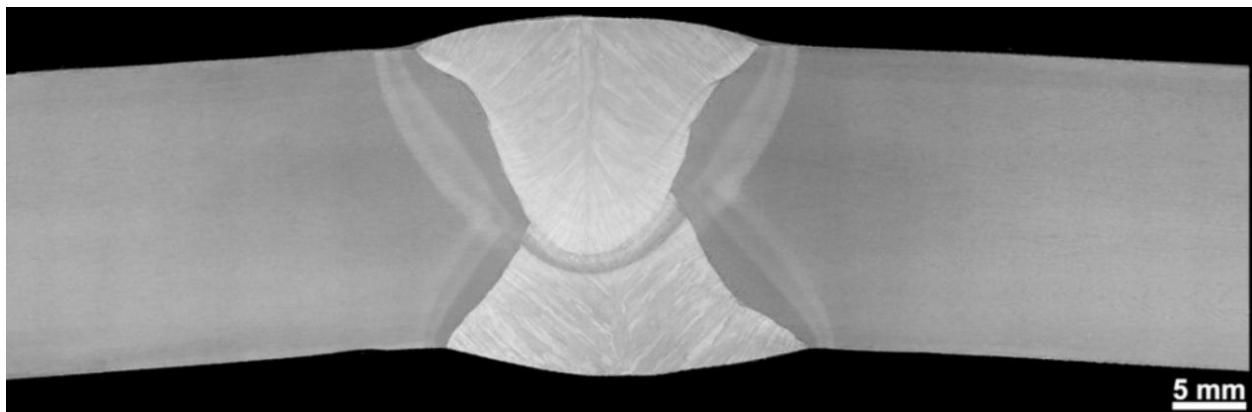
Macrograph of the Structures Present in the Seam Weld of the X80 steel pipe.
